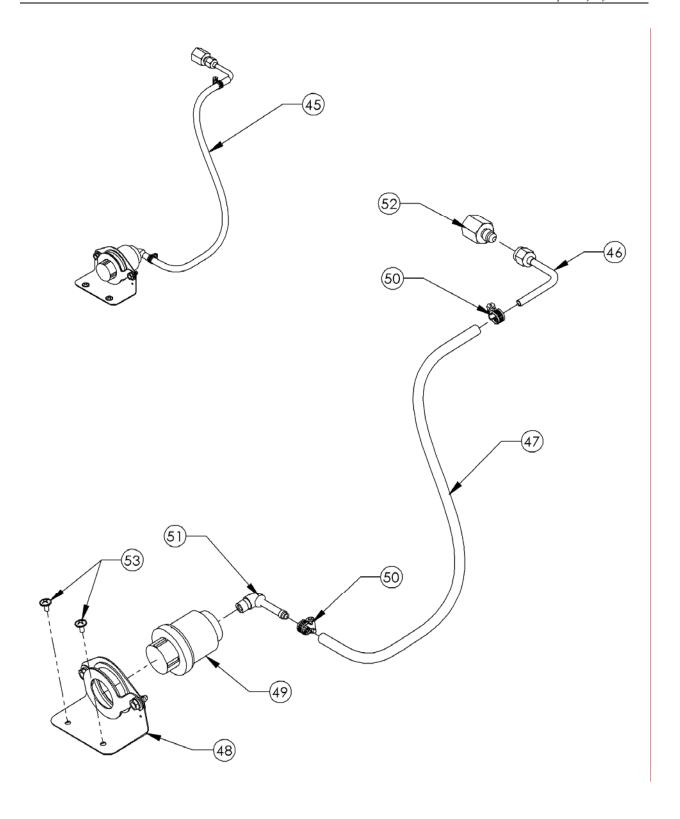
MD500 IBF Optional Equipment Illustrated Parts Breakdown (Sheet 1 of 1)
